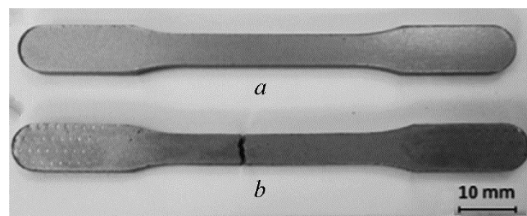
General view of the tensile test specimen sintered at 1150°C for 1 h: (a) before and (b) after fracture
